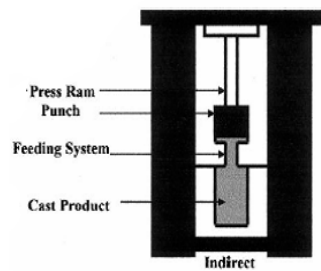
Mechanism of Indirect Squeeze Casting.[4]
